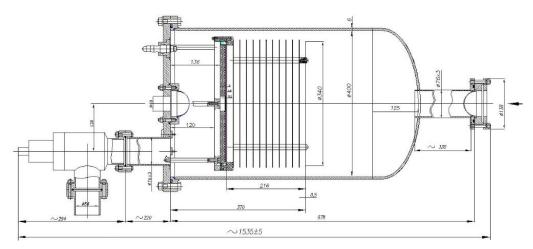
The drawing of ACTAF2 (side view) with the inner structure of the electrodes of the ionization chamber.
